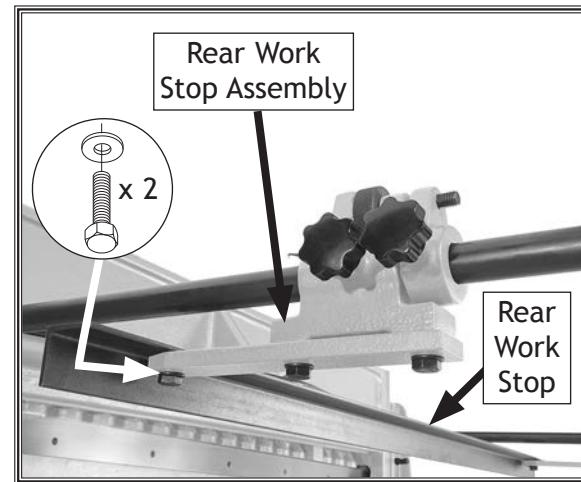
Rear work stop assembly installed on rear work stop support rod.
